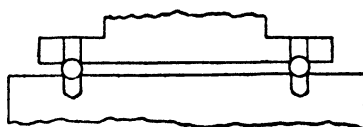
Hinged joint with ball pivots, holes parallel.
